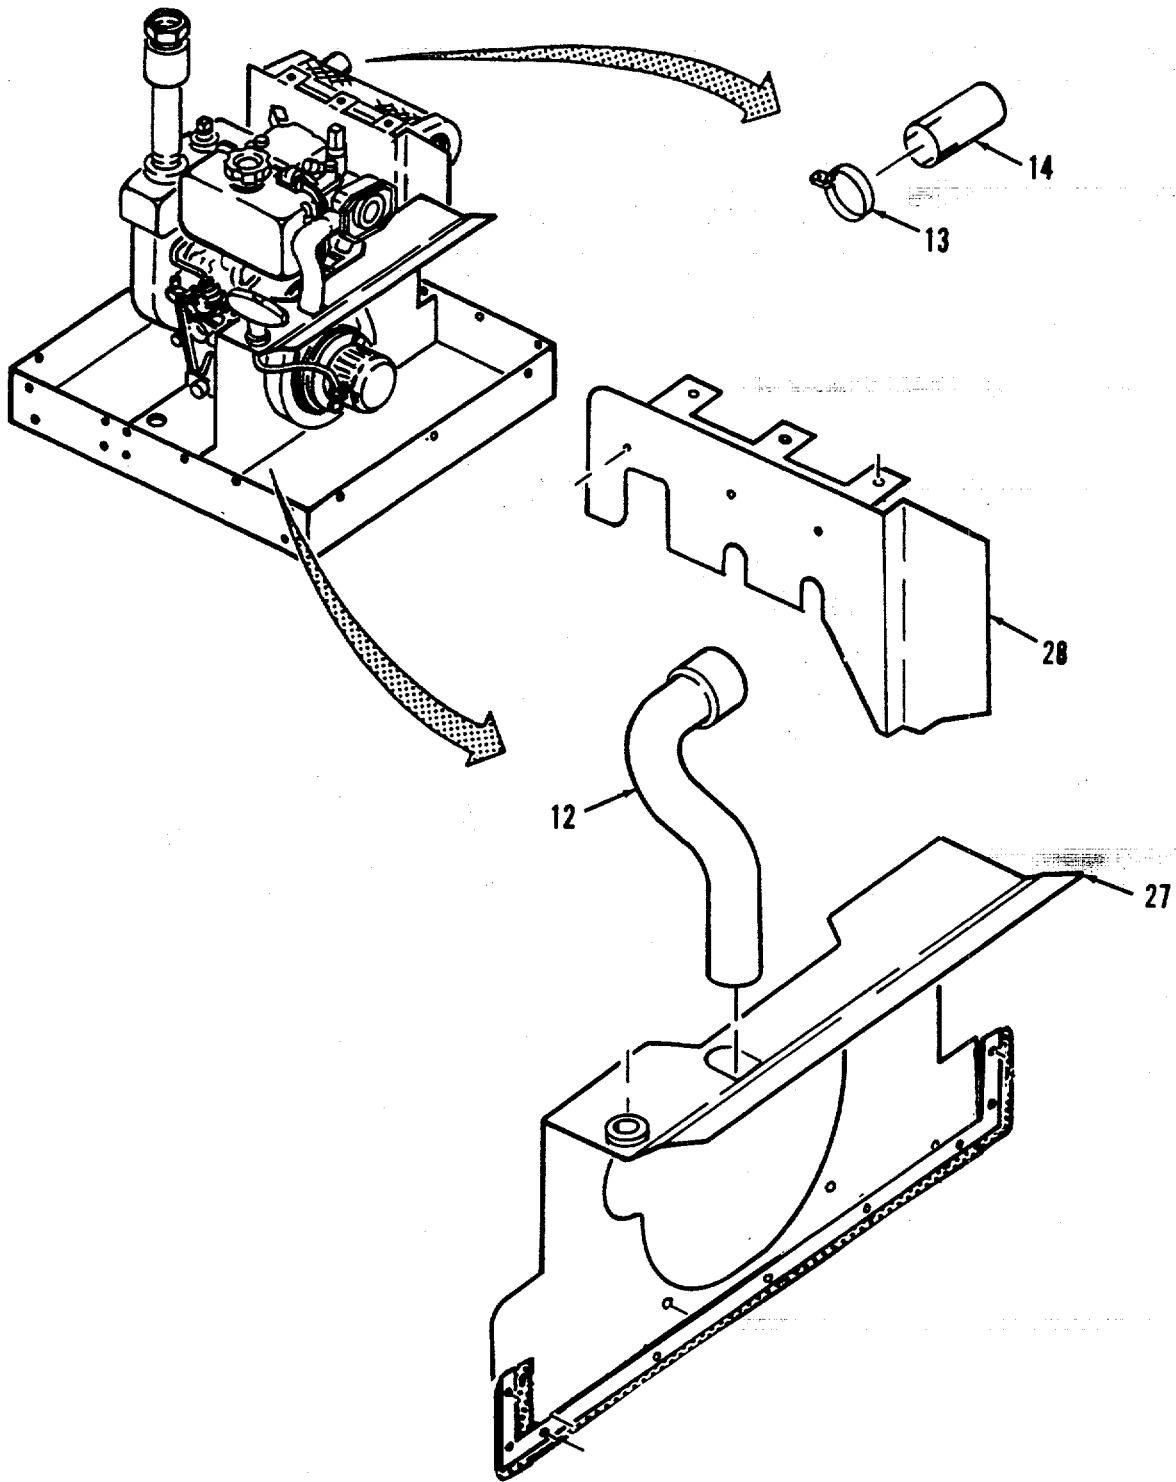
Enclosure Assembly (Sheet 4 of 4)
